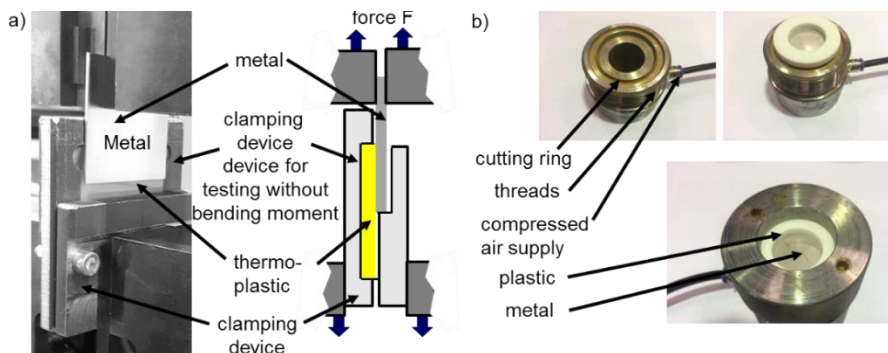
Photo and illustration of performed tests: (a) tensile shear test, (b) air tightness test
